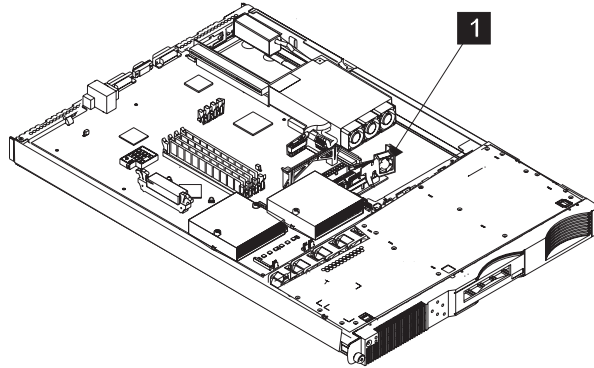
Removing a SAN Volume Controller 2145-4F2 disk drive fan
